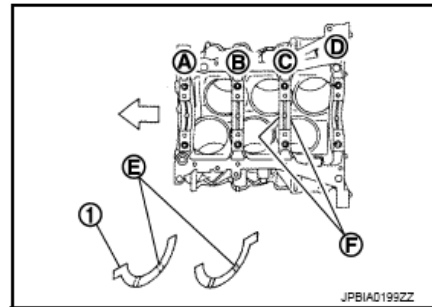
Identifying Thrust Bearing, Oil Grooves And Installation Position
